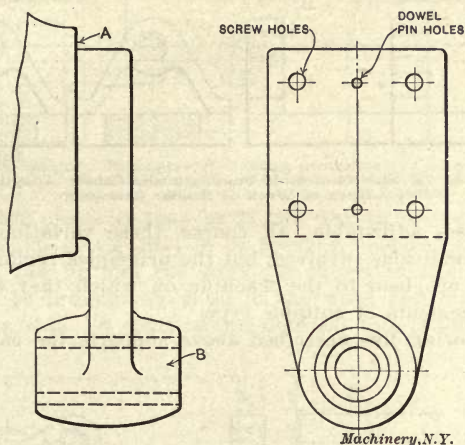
A Case where the Bushing Hole is Bored Previous to Locating and Fastening Bracket on Jig Body
